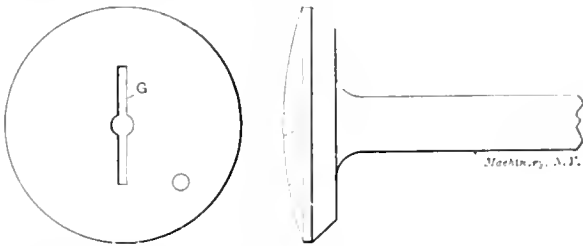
Gas Engine Valve which is formed by the Dies shown in Fig. 2.
